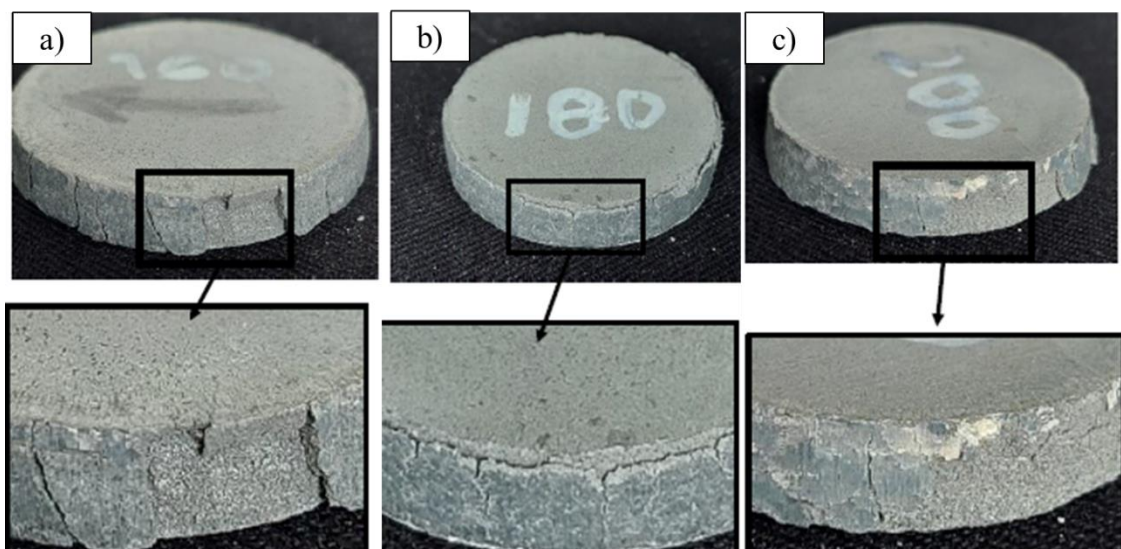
Fracture surface of compressive test of the different compaction (a) 160 MPa, (b) 180 MPa, and (c) 200 MPa.
